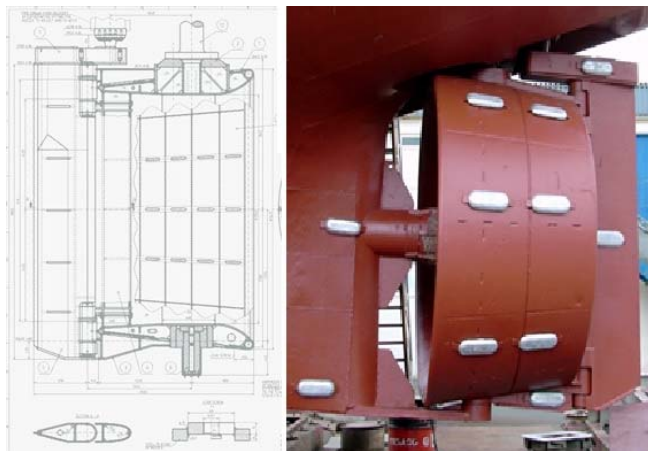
Kort-Nozzle with heel pintle bearing (Becker 2015)
